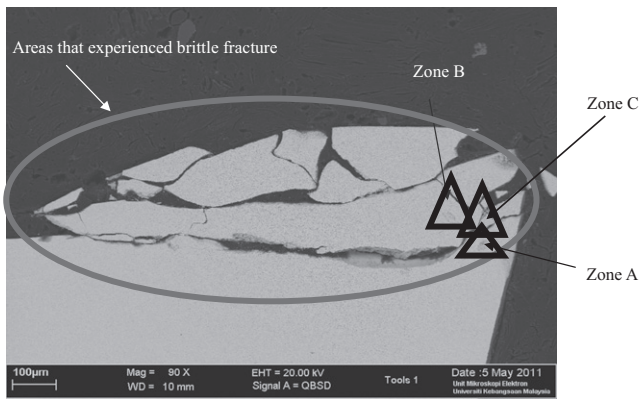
Failure mode on the cutting tool when machining at cutting speed of 120 m/min, feed rate of 0.1 mm/tooth, depth of cut 2 mm, and MQL 50 ml/J.
